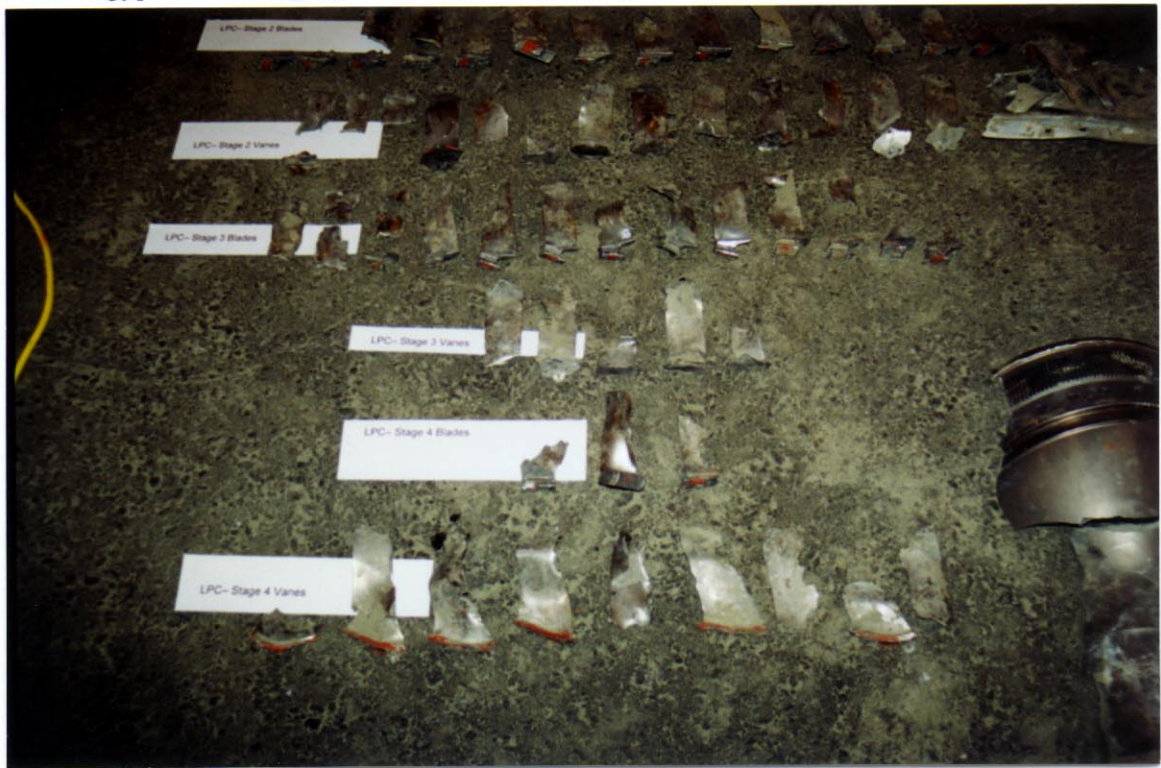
Pieces of No. 2 engine LPC blades and vanes.
